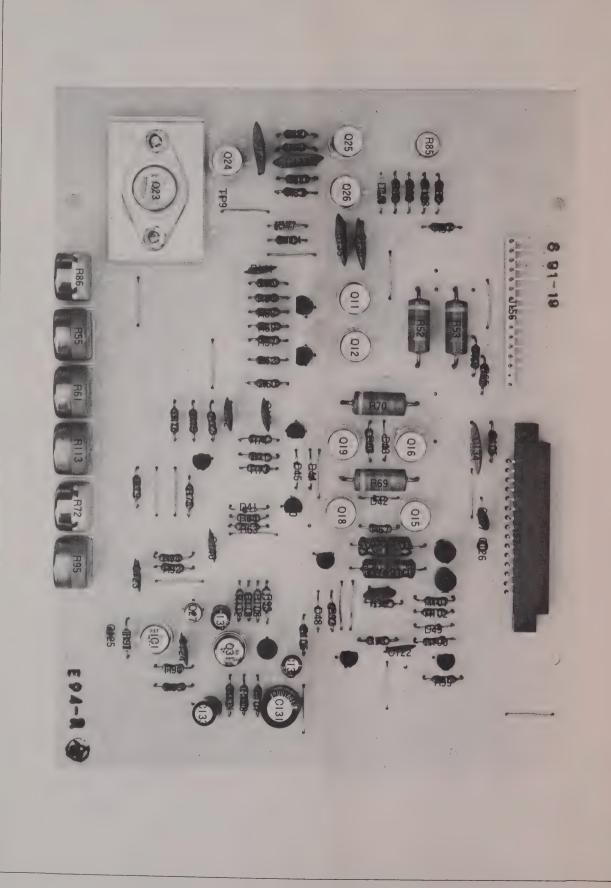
CRT DRIVER Bd LAYOUT (SG210)
